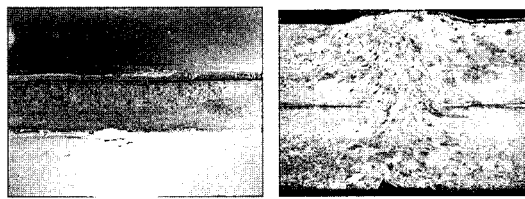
Weld defects for autogenous laser lap welding of zinc-coated steel
